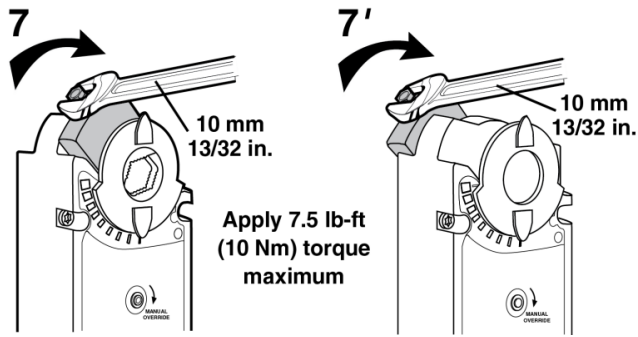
Fasten the Shaft Adapter to the Shaft.
